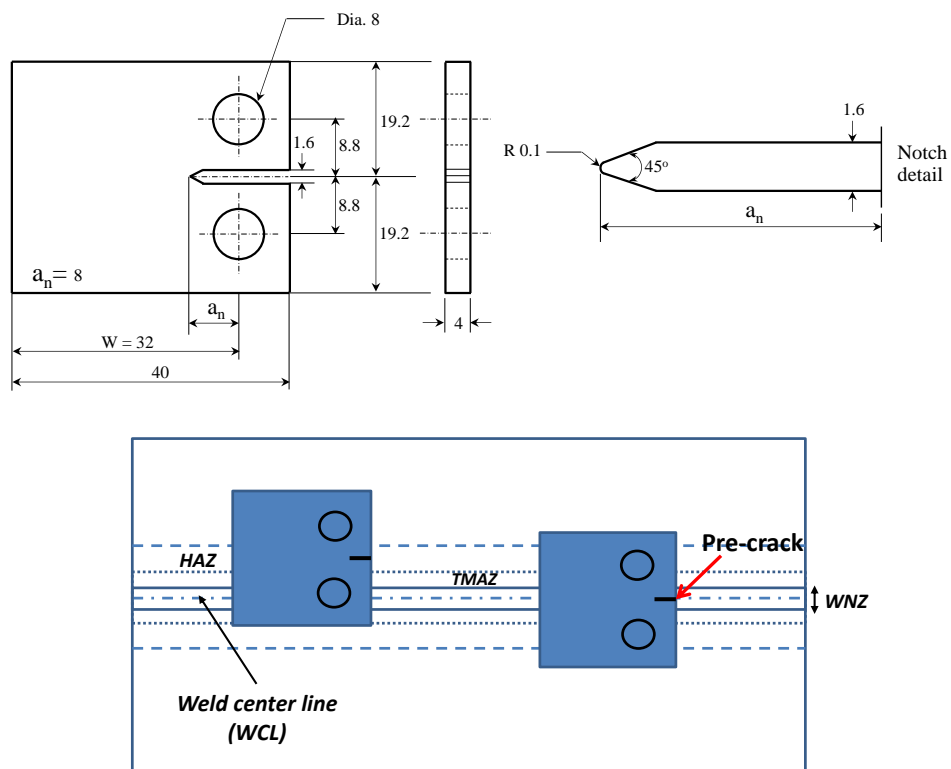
Geometry of CT specimen used and FSWed specimen layout (in mm).
